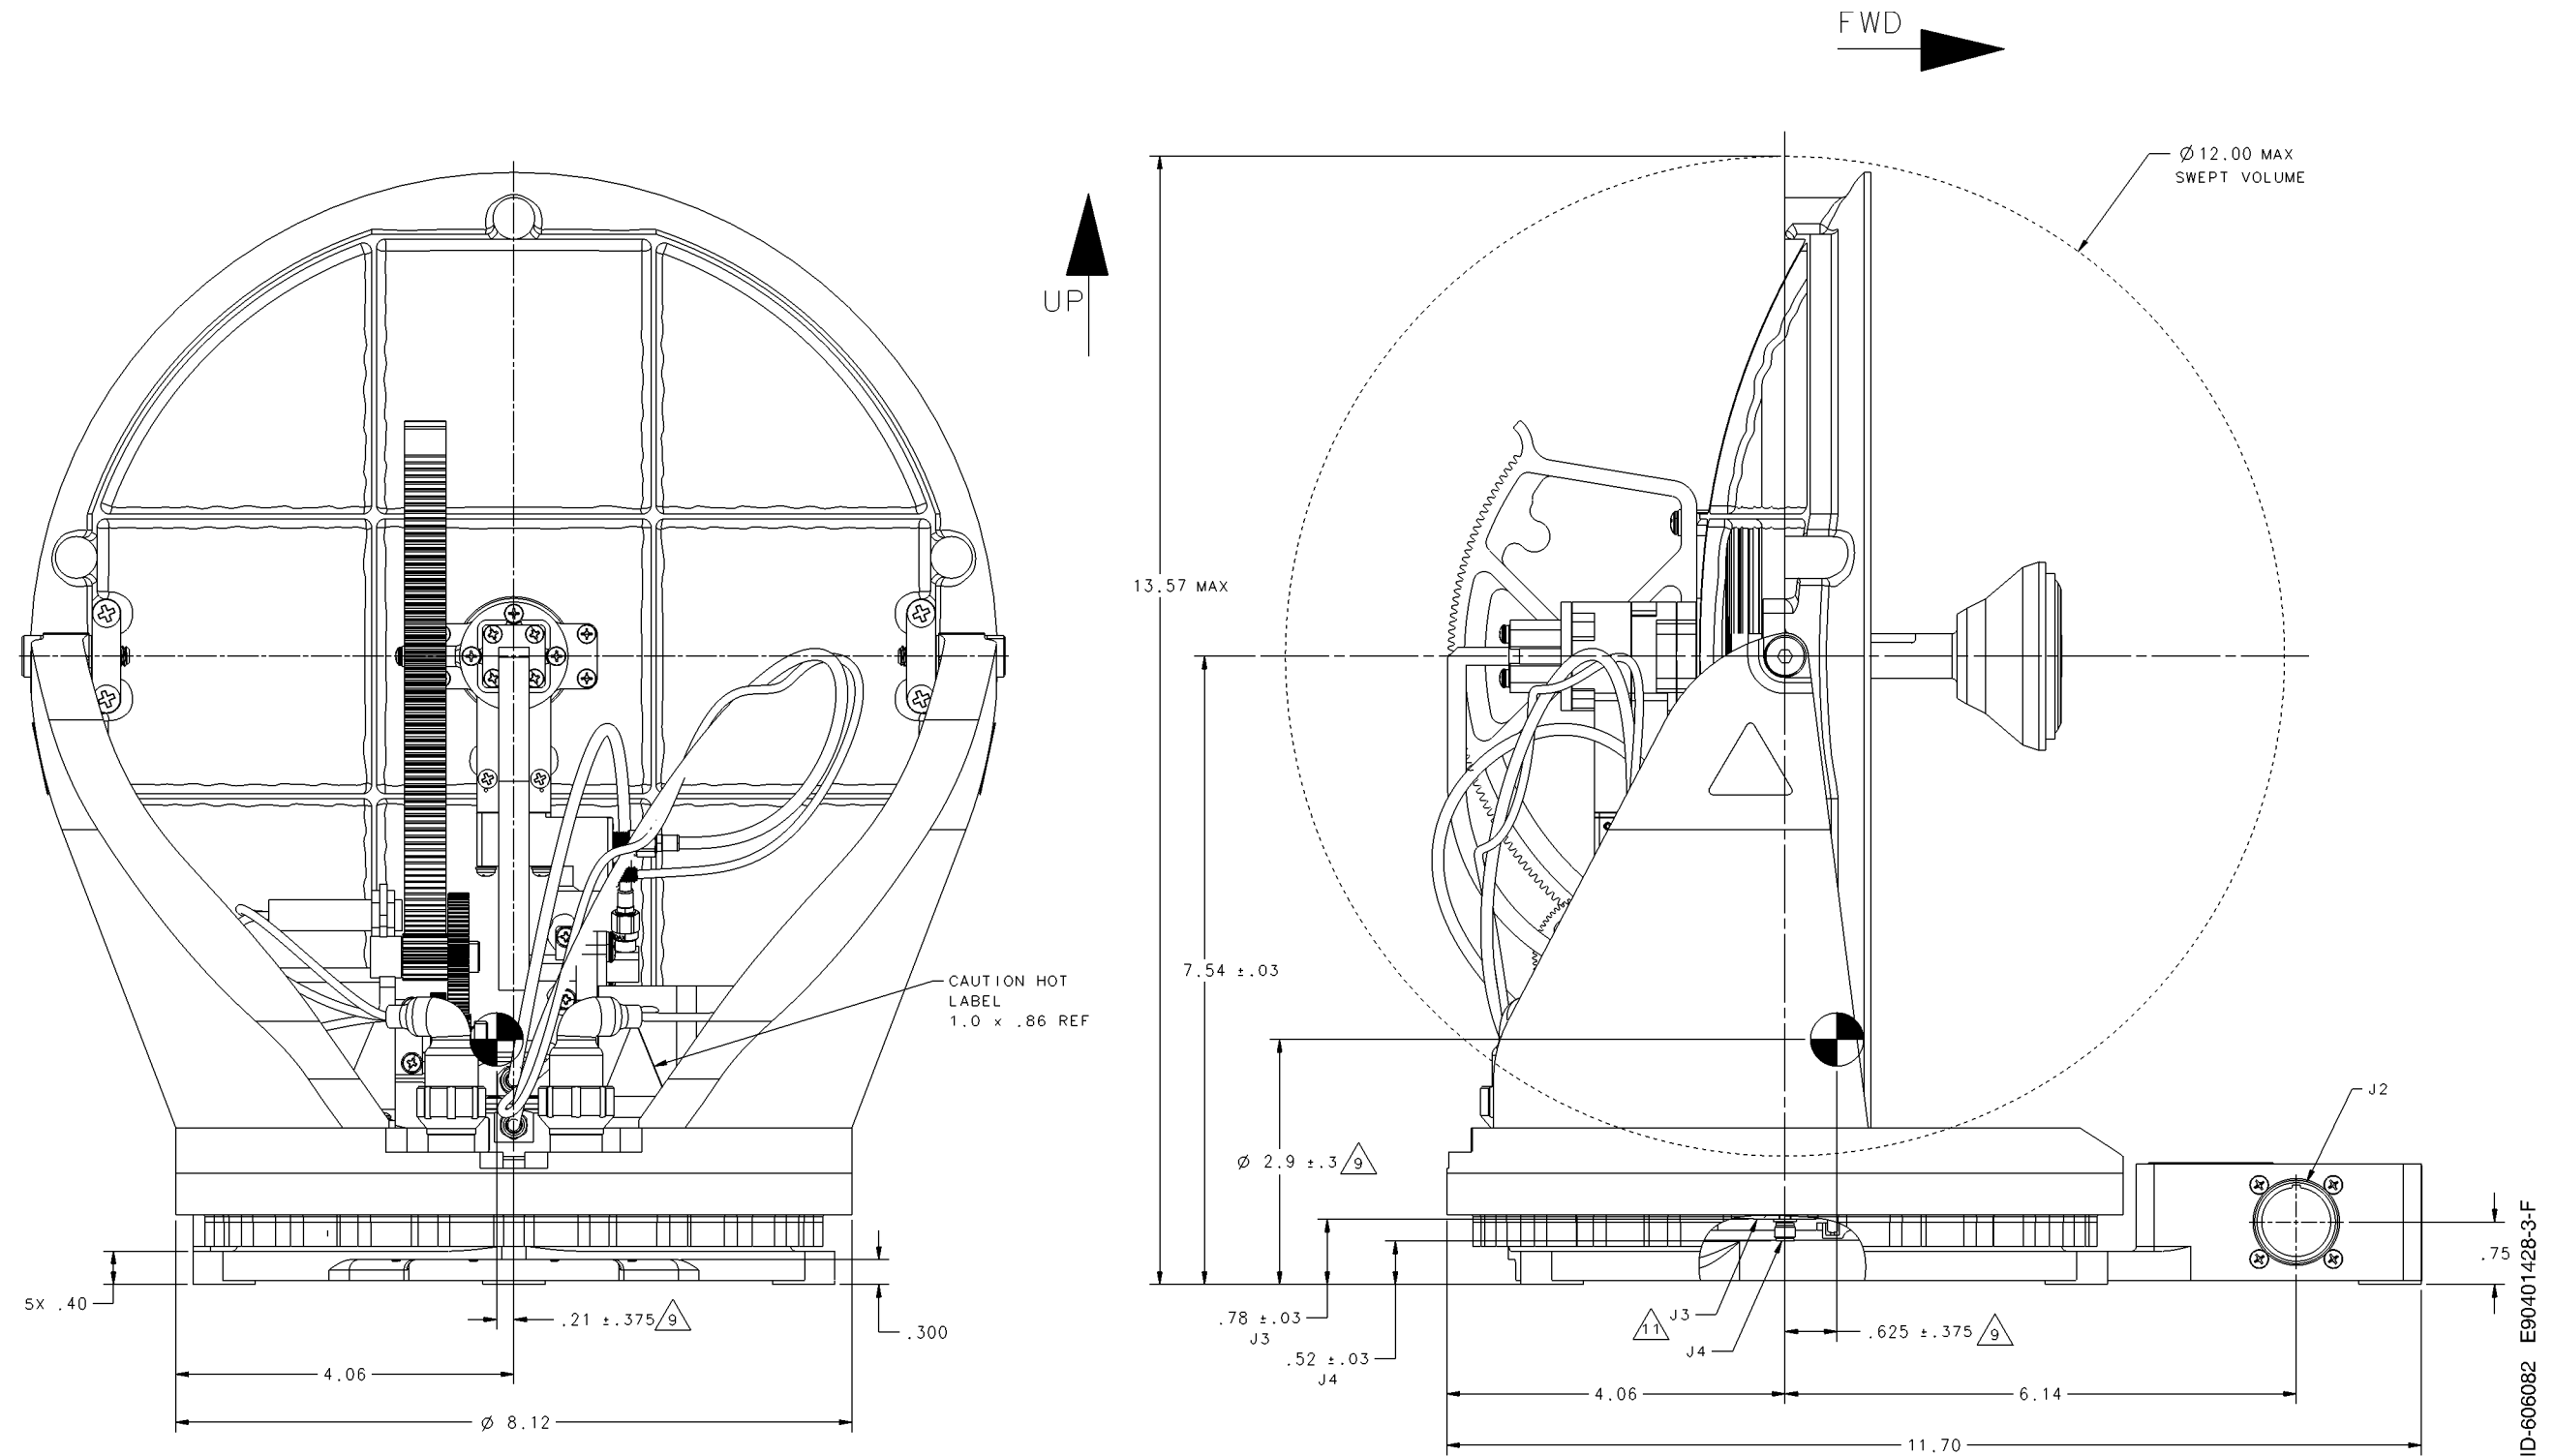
(Sheet 3 of 4) TMA Outline and Installation Drawing (90401428, REV F)
